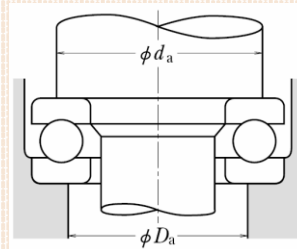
Face Supporting Diameters for Thrust Ball Bearings
